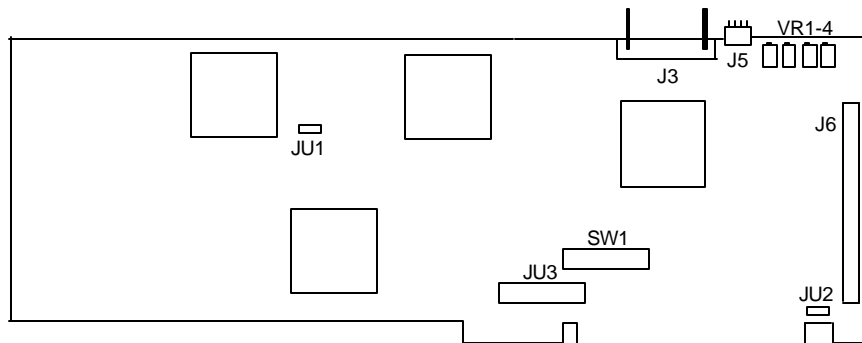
PC/AT Mx4 cnC++ Card Component Side
